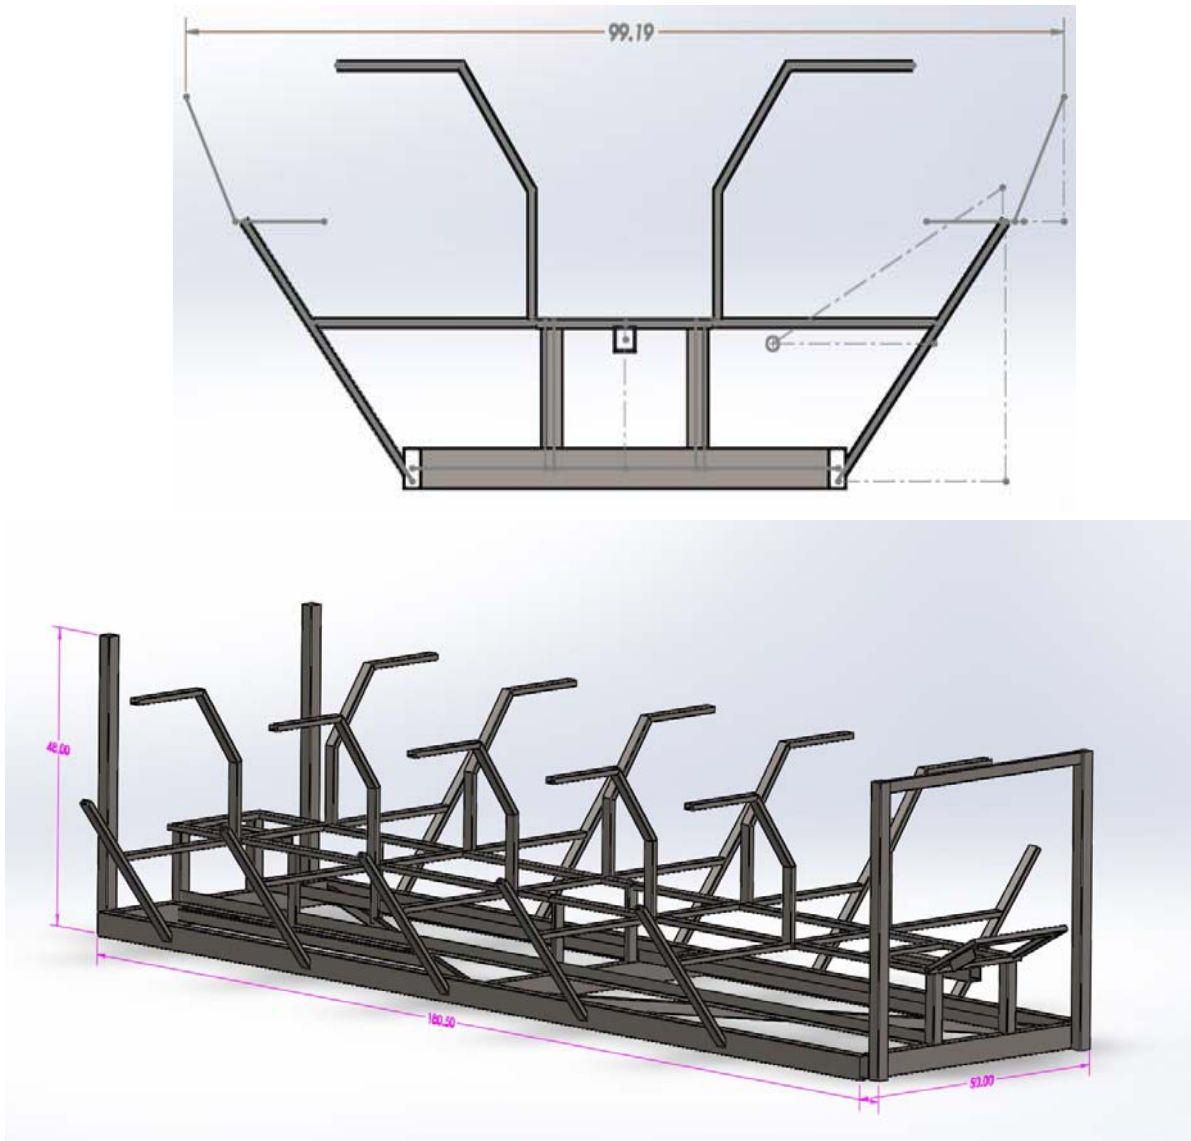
CAD renders of the final frame design for the Pedibus including the major dimensions.
